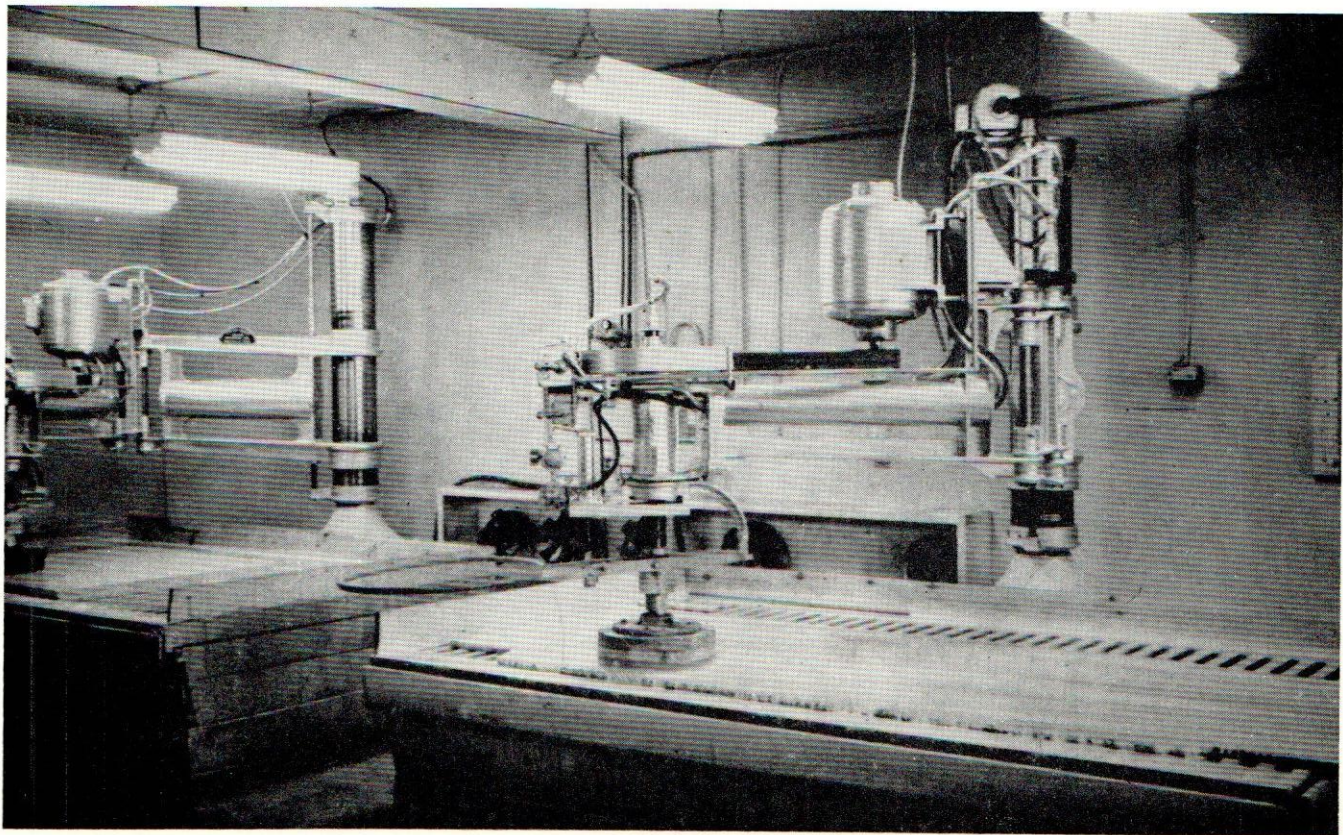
Gritting and polishing marble. (Photo courtesy Ty-Sa-Man Machine Co., Knoxville)
